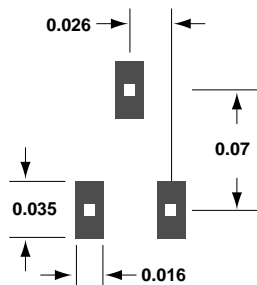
PCB Pad Layout, SOT-323. (dimensions in inches).
